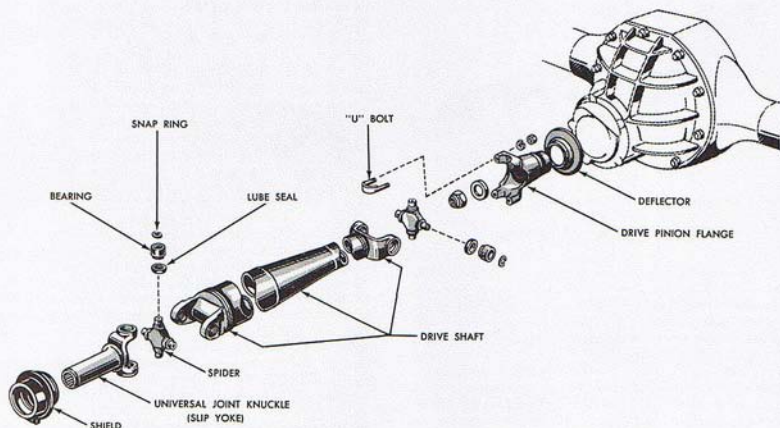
Typical Hotchkiss Drive Line—Disassembled
